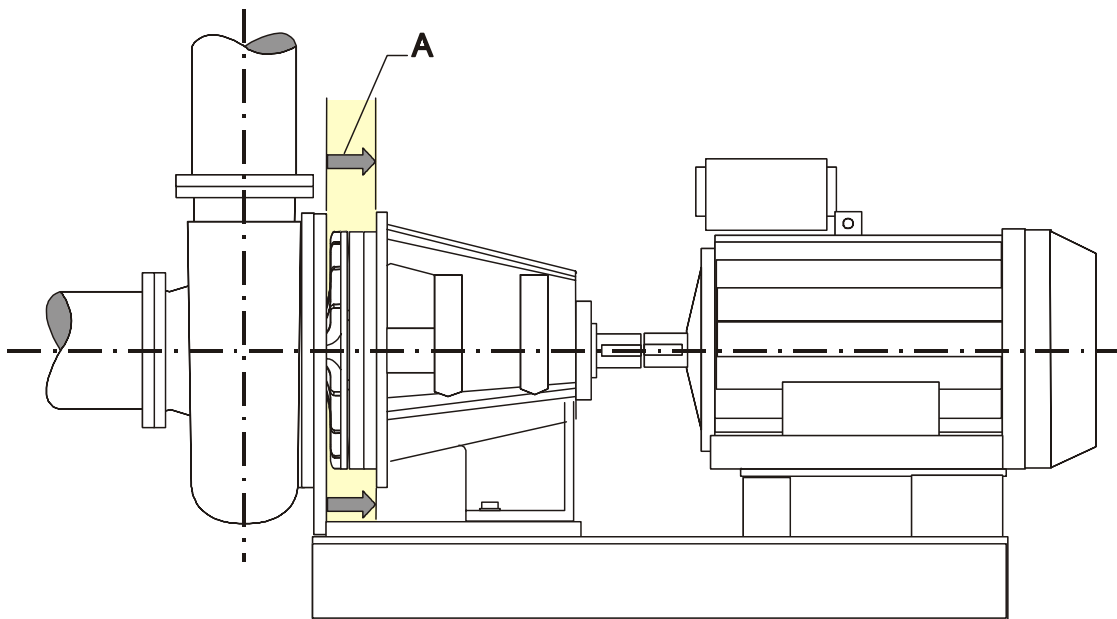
Using back pull-out method avoids having to disturb the pipe-work
